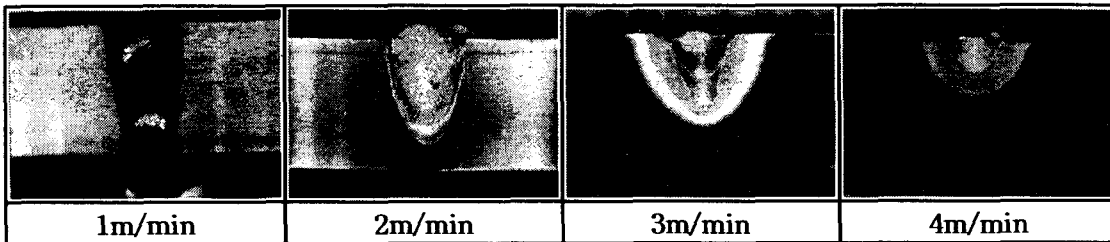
bead shape of A7N01 alloy with various welding speed (laser power: 4kW)
